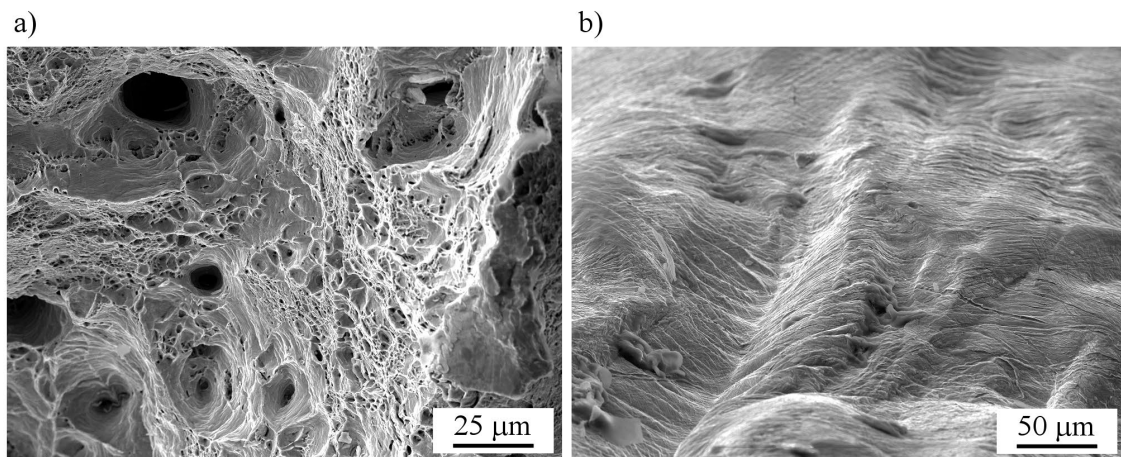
Detail of fracture surface of tensile specimens for the cast variant at RT. Typical ductile dimples on fracture surface (a) and wrinkles on the cylindrical part of specimen resulting from strong plastic deformation in the area of necking (b).
